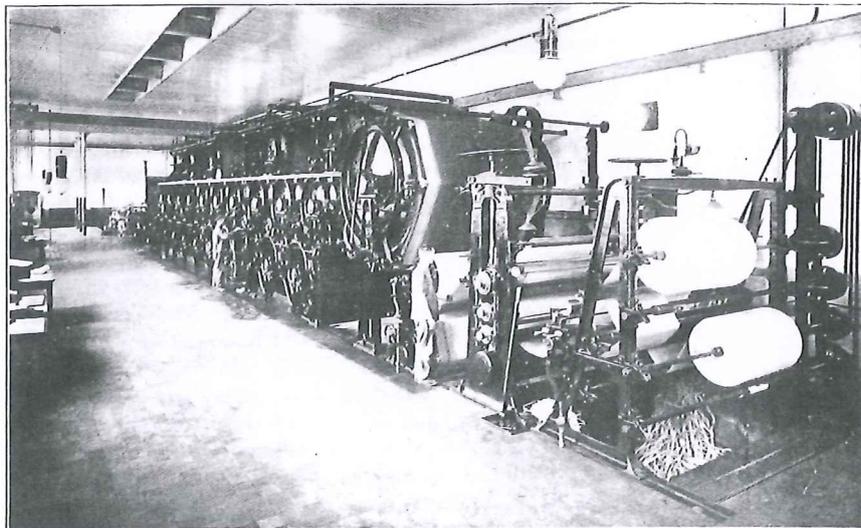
PAPER MACHINE NO. 4, 75 TONS.
